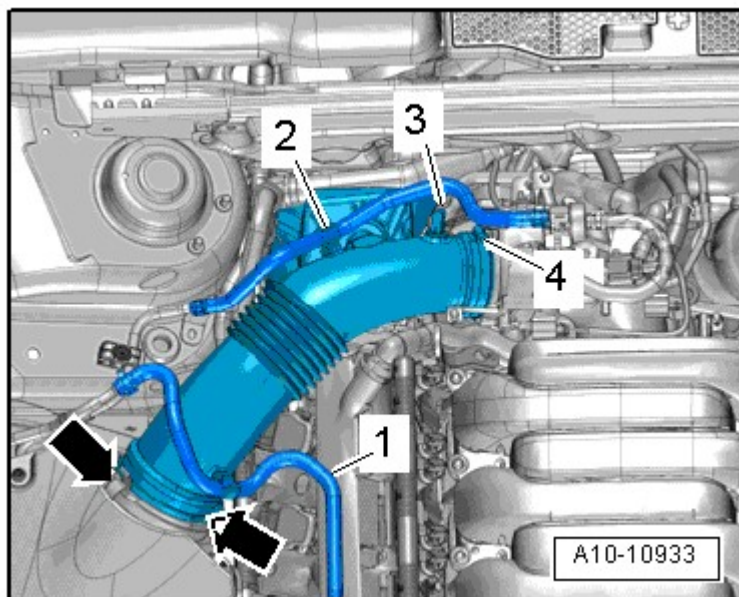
Removing Air Guide Pipe By Loosening Hose Clamp -4- & Opening Clips -Arrows-
